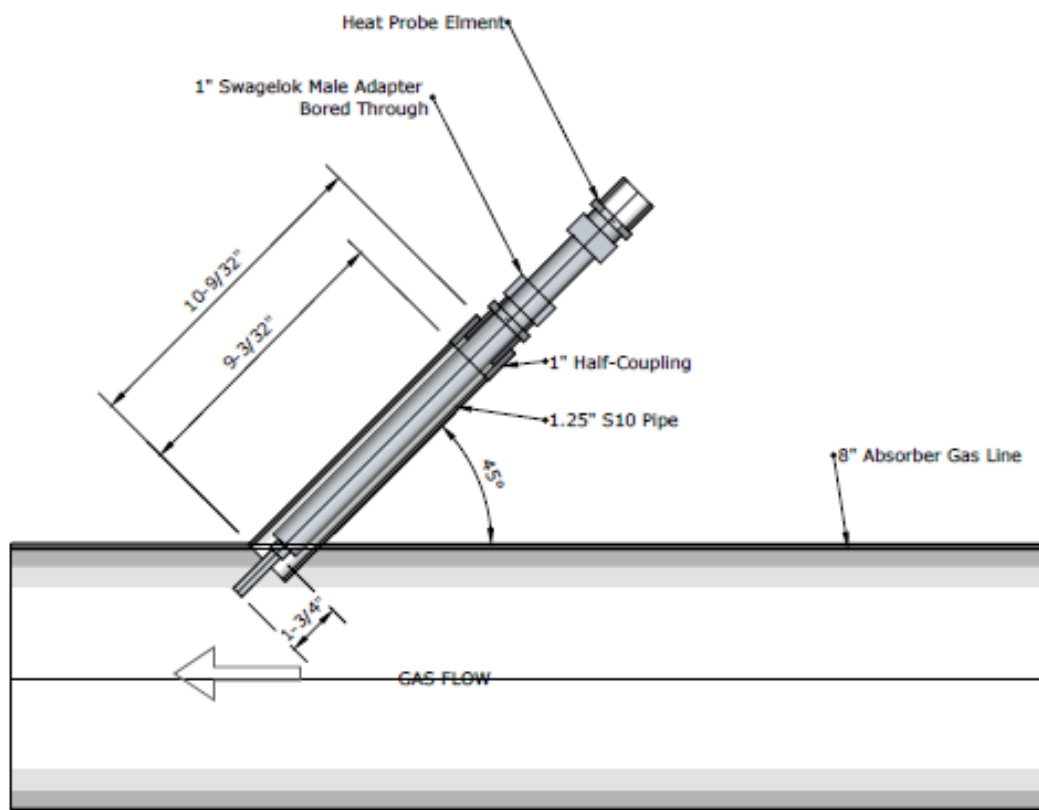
Heated sample probe installation at UT-SRP pilot plant.
